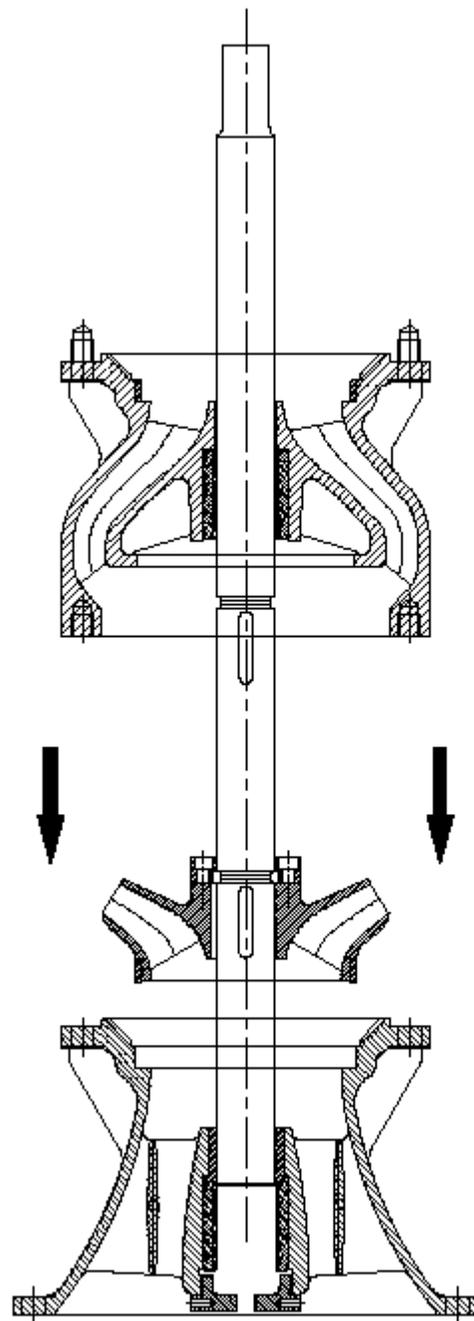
ASSEMBLY OF BOWL ASSEMBLY
